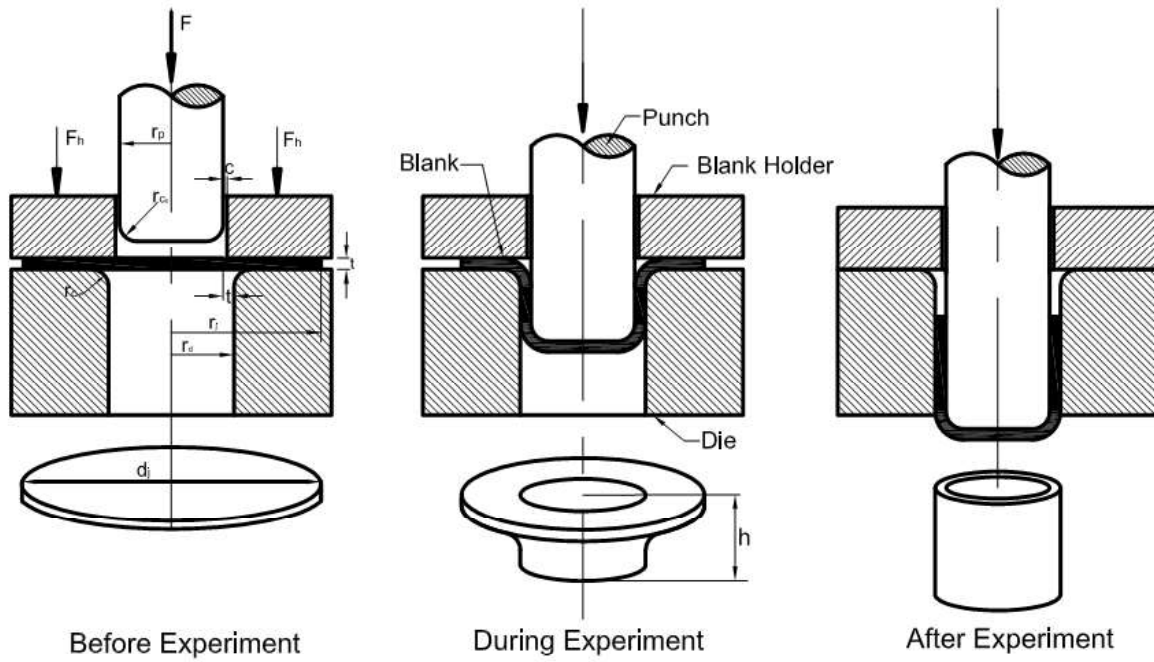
Schematics of deep drawing: (a) Die-Punch combination and position of Blank before drawing, (b) Drawn cup with flange, and (c) Drawn cup without flange
